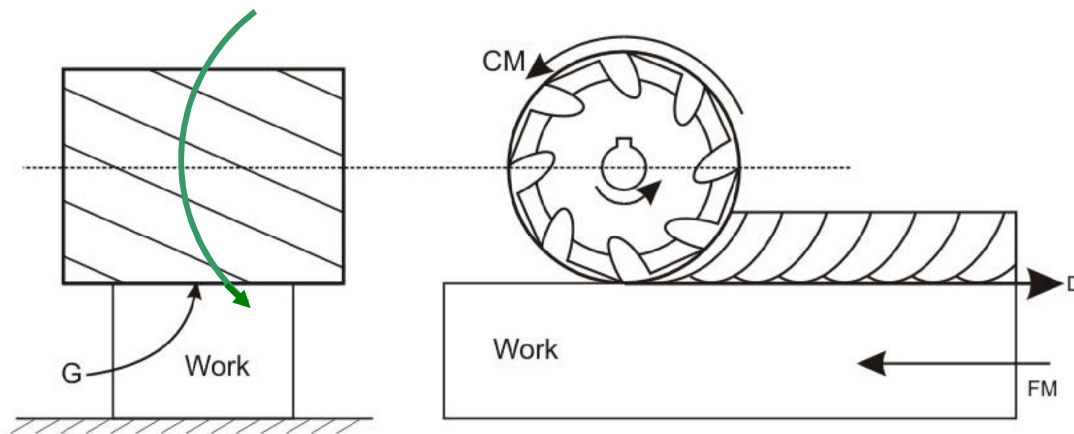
Directrix formed by tangent tracing in plain milling
